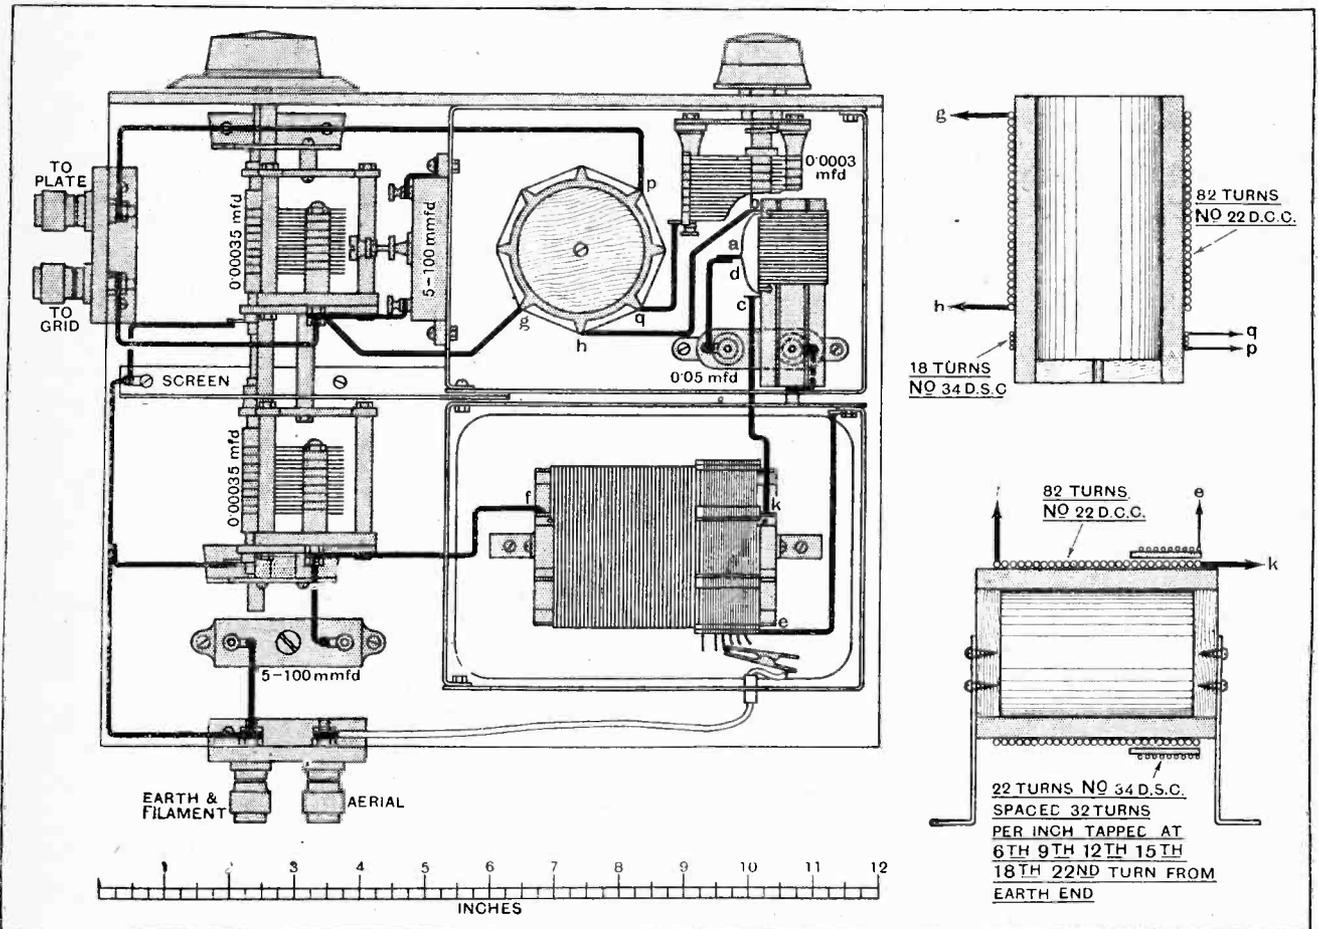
General layout and wiring plan of the unit. The separate aerial winding is wound on 3/32in. spacers—matches will do.
